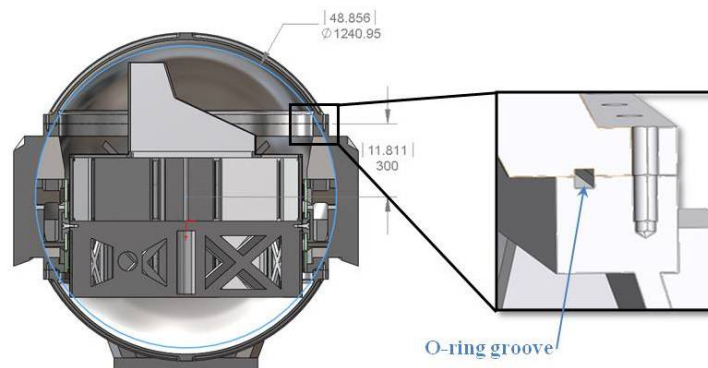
Cross-section of assembled cryostat with detail of hatch o-ring groove.
